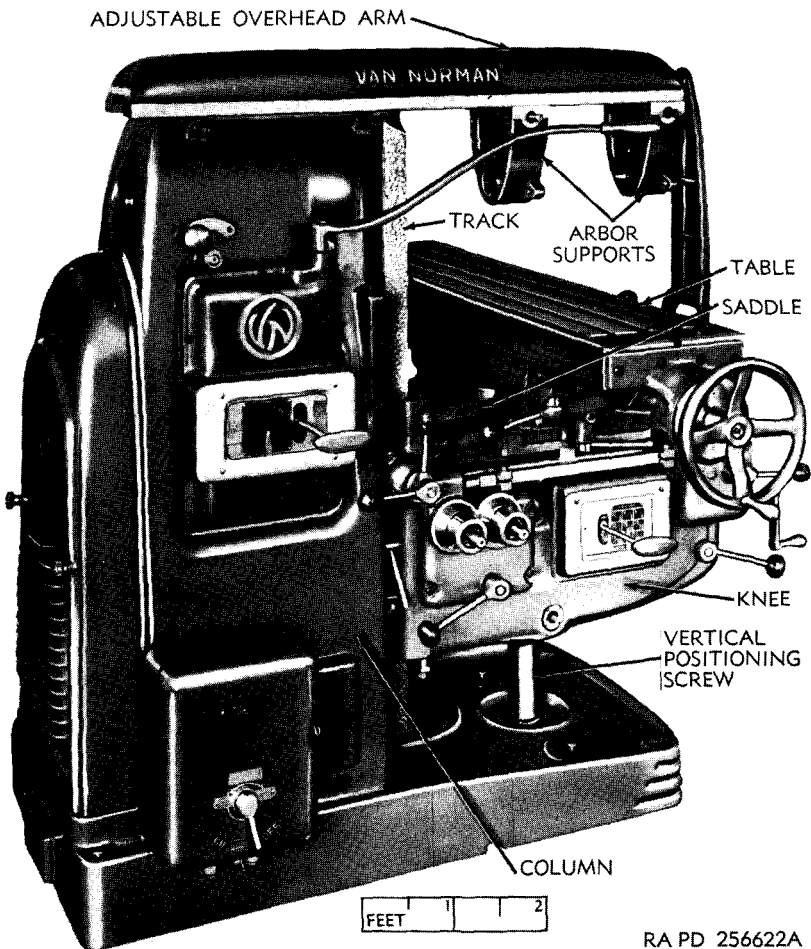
Knee-type floor-mounted plain horizontal milling machine.
